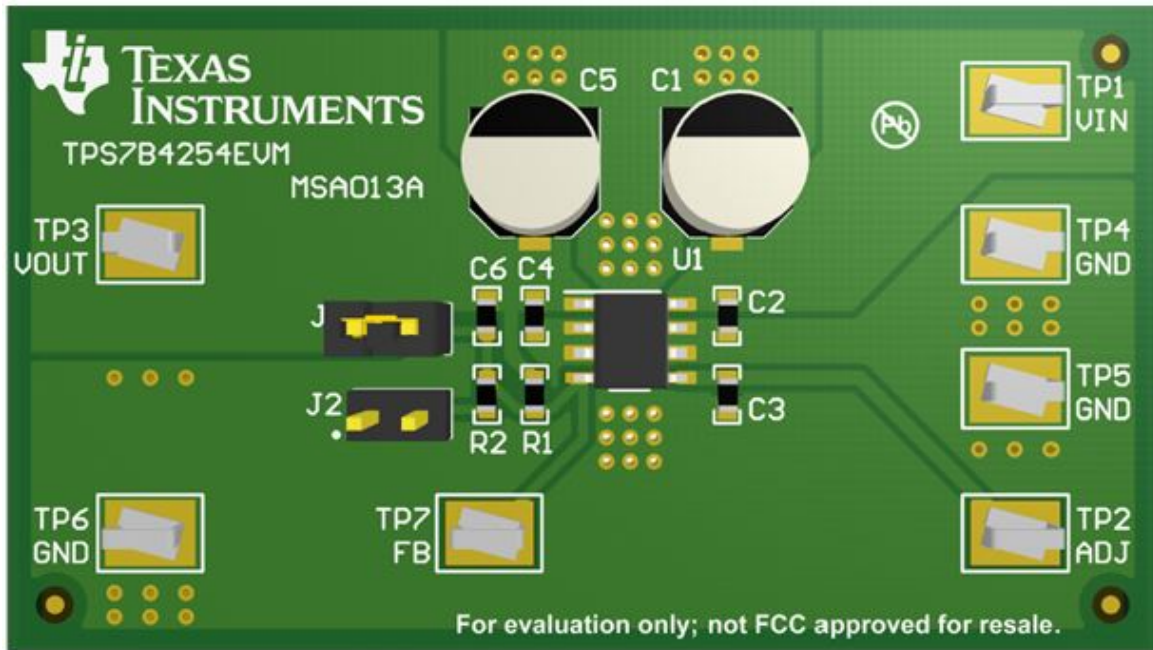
TPS7B4254EVM Component Placement (Assembly Top View)
